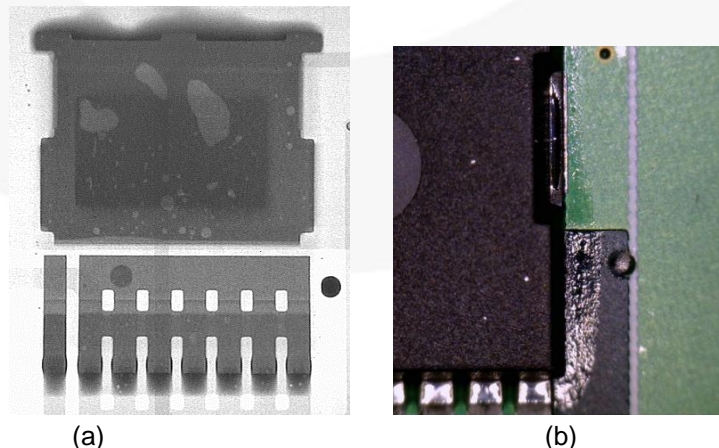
(a) X-Ray Image of Board Mounted TO-LL with Solder Beads Under the Package, (b) Solder Bead
